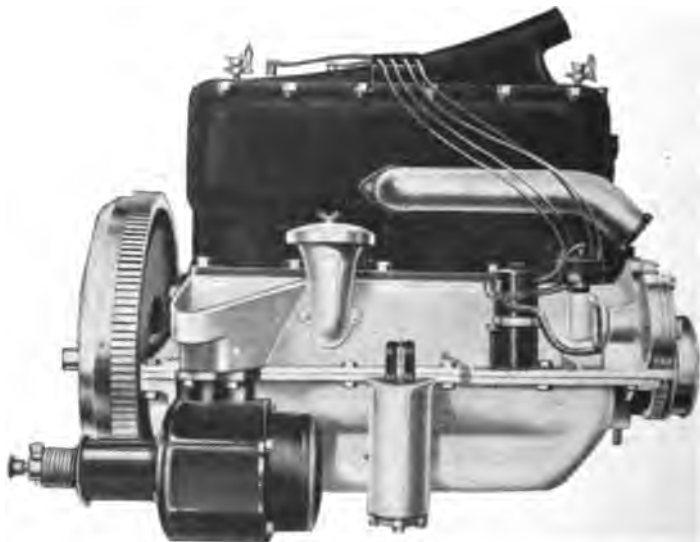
Auto-Lite starting motor and ignition system installed on 1917 Overland engine
